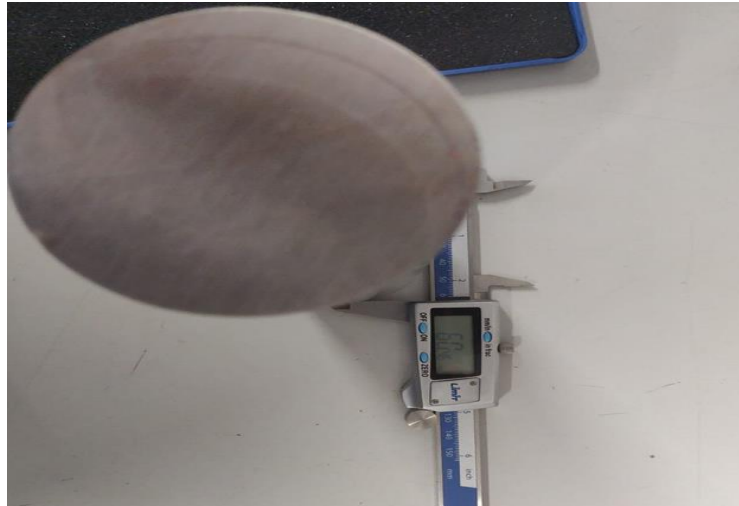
Diameter of Inconel 601 cylindrical bar.
